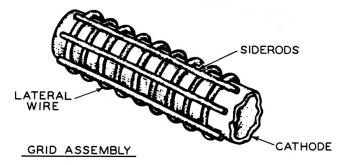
"Inside-out" grid with side rods outside the lateral wire.
